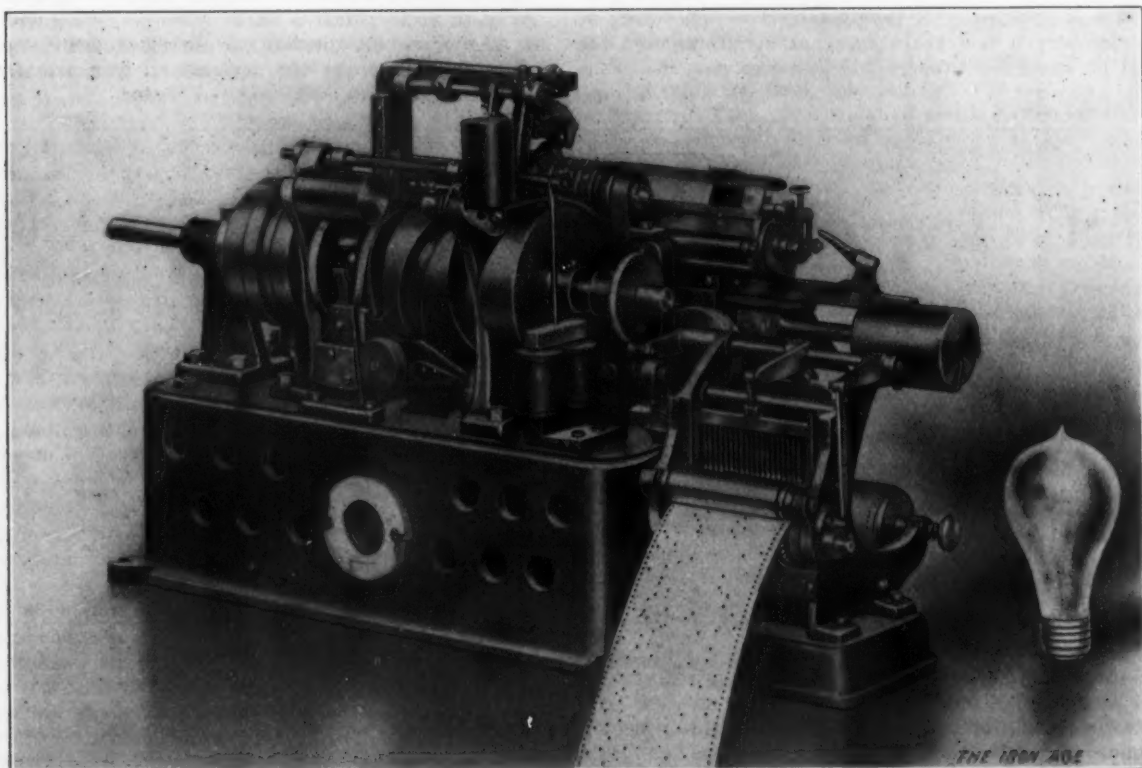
The Reproducer, Rear View, Showing the Cams for the Various Movements.
